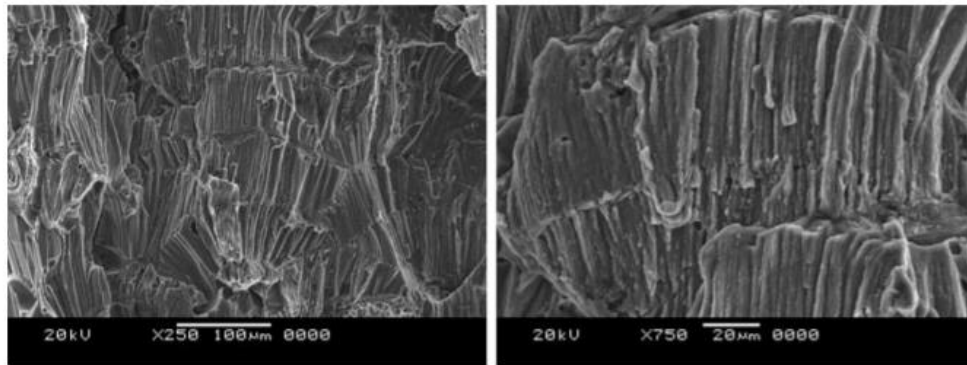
SEM images of AA6061 T6 vertical surface Charpy test fracture surface [81]
